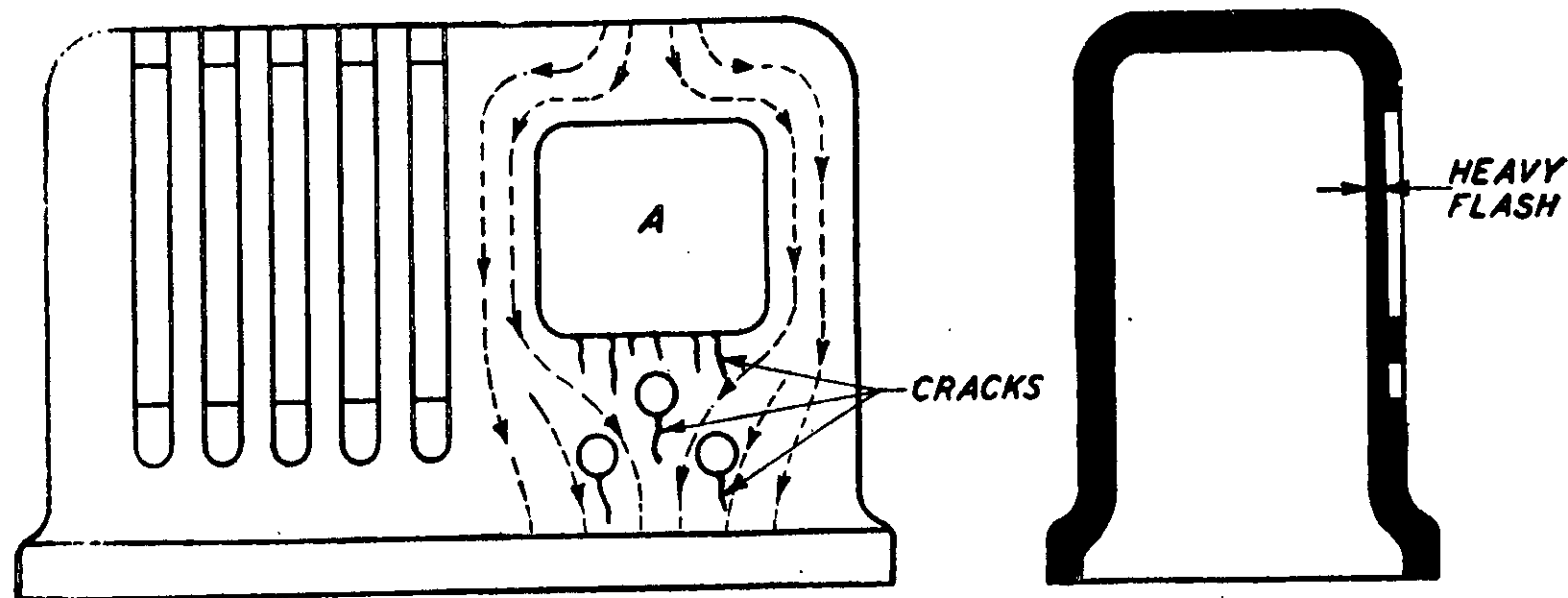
Radio cabinet molded with side core to produce opening A and holes below. Cabinet is molded upside down, and the material flow is indicated by the broken lines. A weak section will form below these openings where divided flow meets on far side of pin. This often causes cracking to occur during aging, because compound fails to "knot" compactly. To avoid this, a heavy flash should be used in openings so compound will flow over pin as well as around it.
